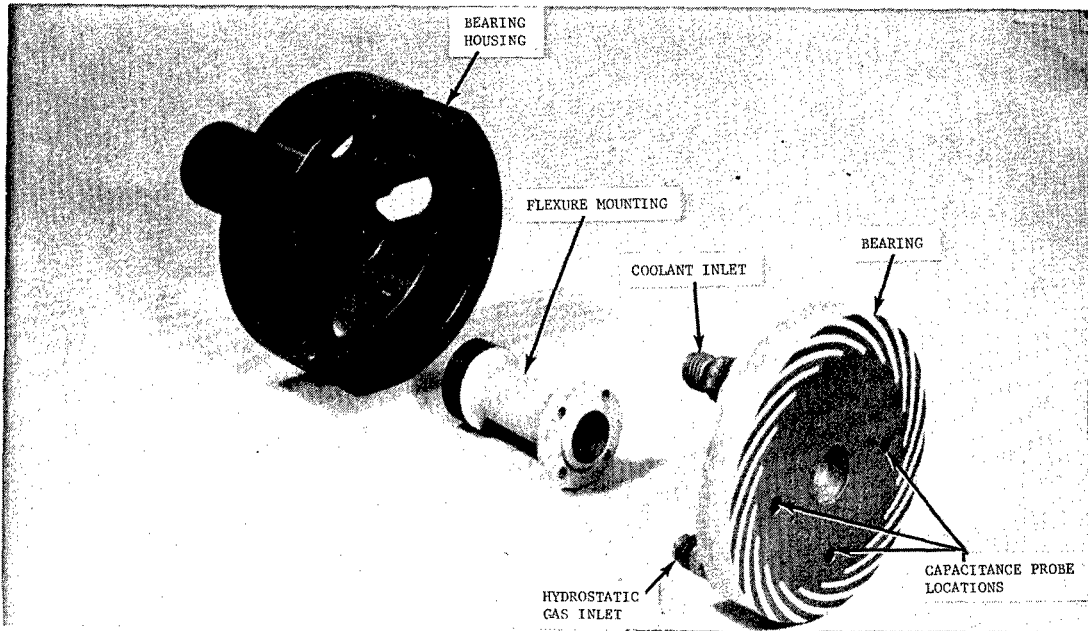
Combination Helical-Grooved Hydrodynamic And Hydrostatic Forward Thrust Bearing Stator And Associated Mounting Parts
